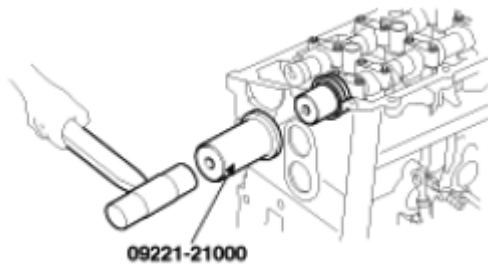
Installing Camshaft Bearing Oil Seal Using SST (09221 - 21000)
